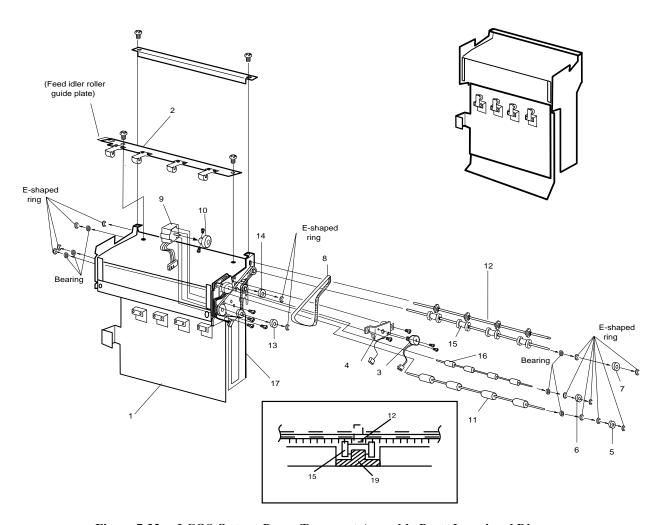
LCOS Output-Paper Transport Assembly Parts Locational Diagram
